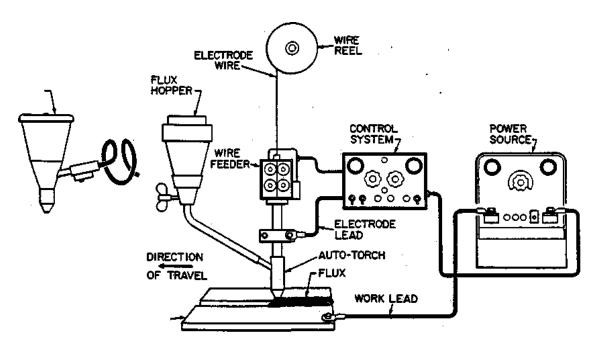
SUBMERGED ARC WELDING PROCESS
